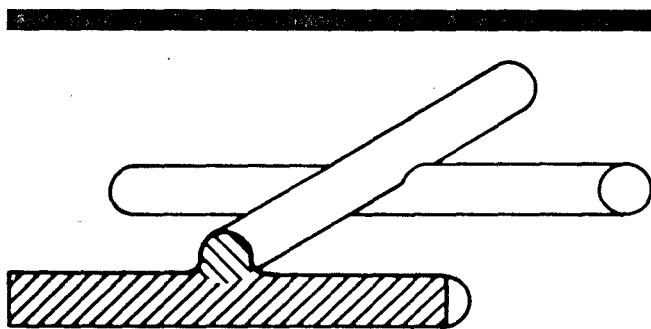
Section of a Typical Cross Wire Weld
